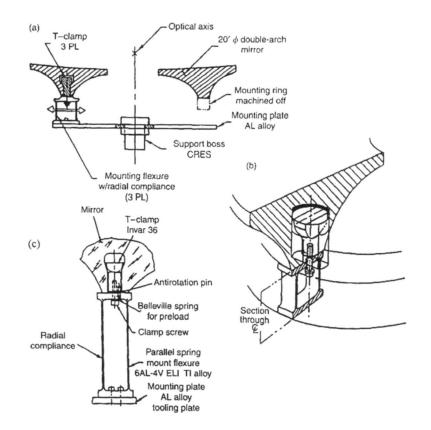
A mounting design for a double arch mirror. (a) Sectional view, (b) isometric view of one clamp and flexure mechanism, and (c) sectional view through the latter mechanism. (From Iraninejad et al.²⁴)
